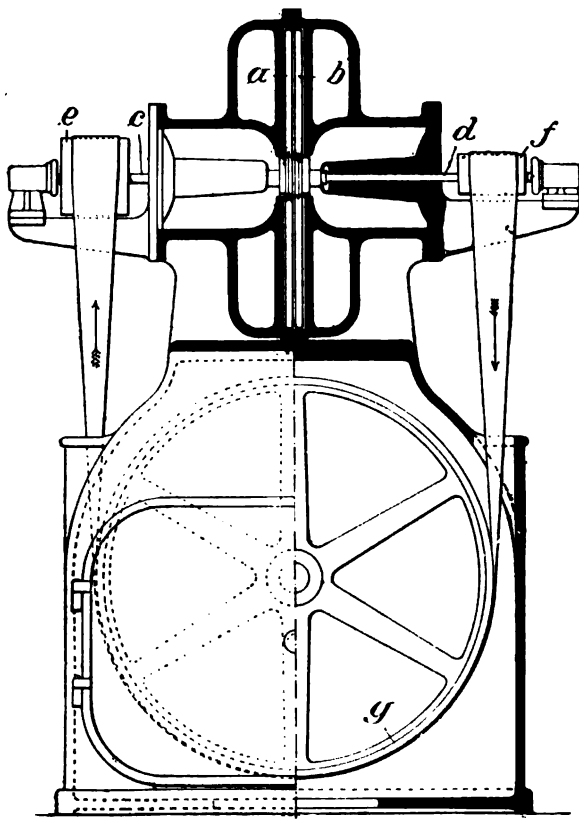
Seger Steam Turbine showing Belt-driving Arrangement.
